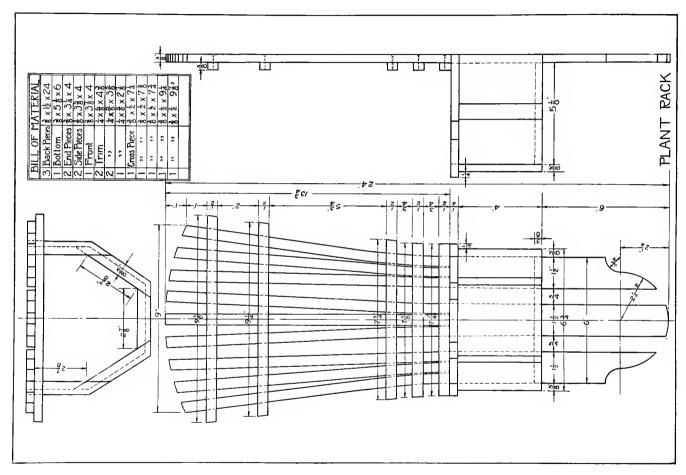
Working Drawing of Plant Rack (Eighth Grade)
